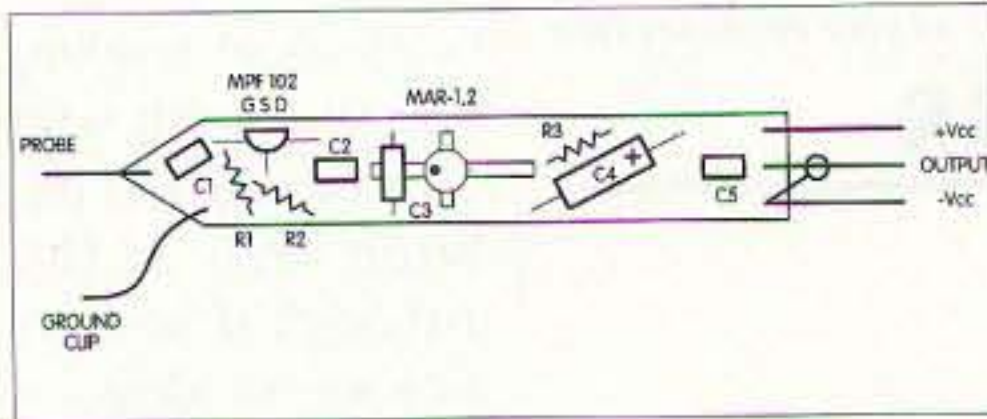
Parts layout for FET probe using a Mini-Circuits MAR-1 or MAR-2 MMIC.
